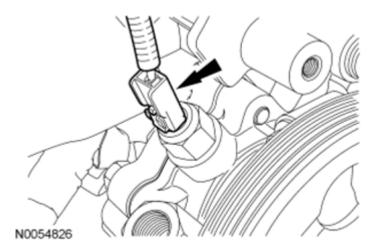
Locating PSP Switch Electrical Connector Courtesy of FORD MOTOR CO.
